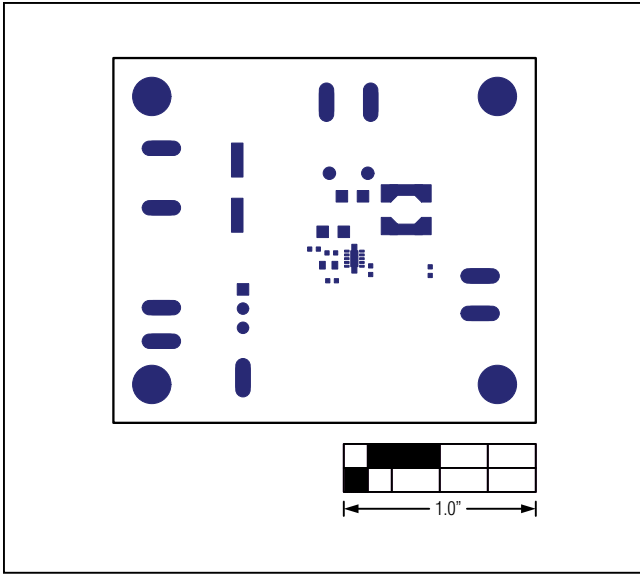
MAX17501A/MAX17501E EV Kits PCB Layout—Top Solder Mask
